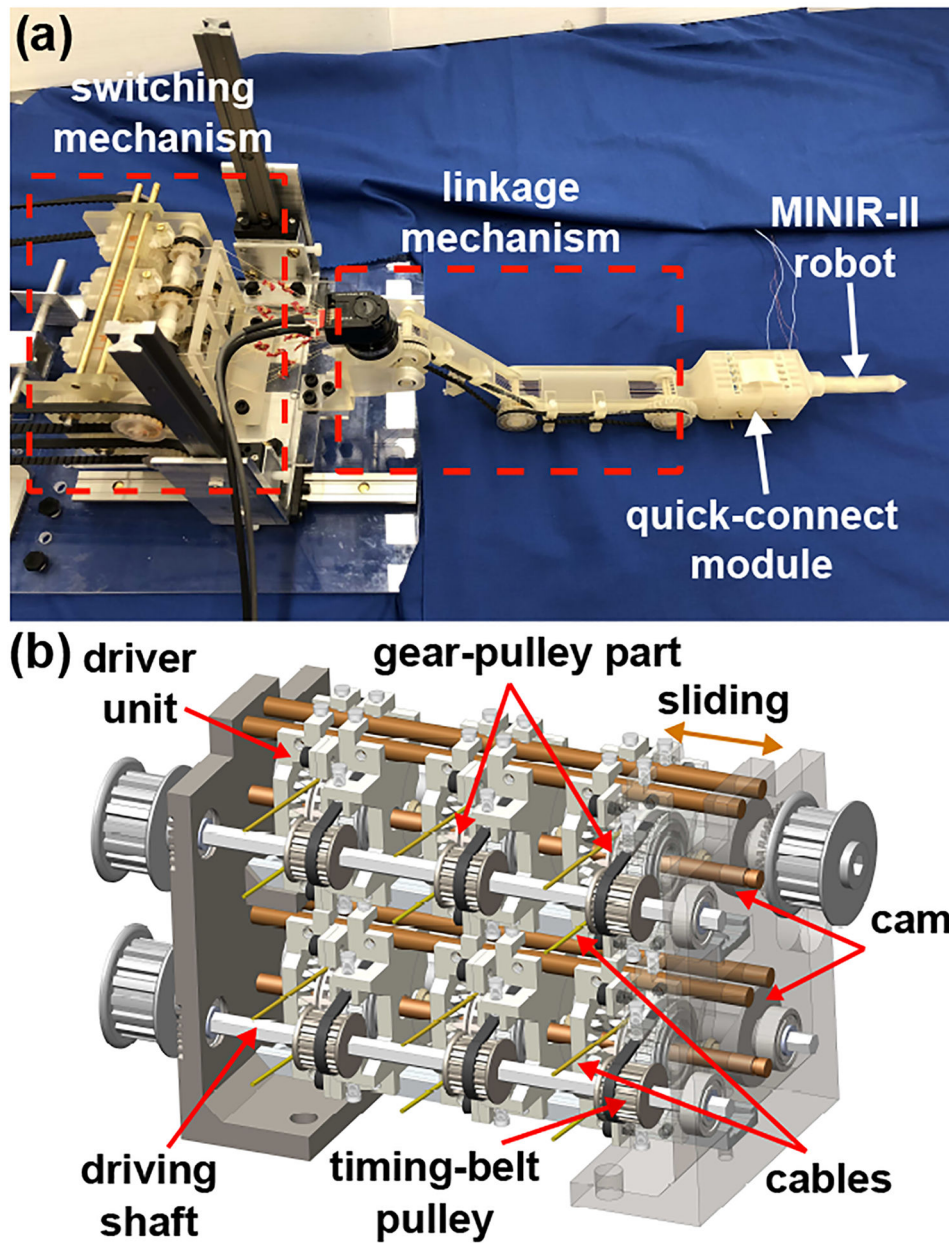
(a) MINIR-II robotic system consisting of the switching mechanism, linkage mechanism, and the quick-connect module. (b) Detailed CAD model of the switching mechanism.
